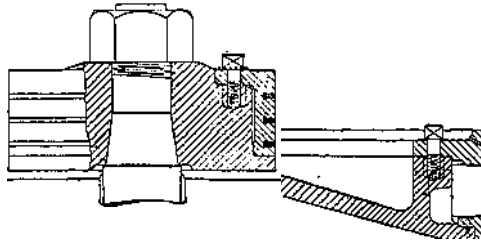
Typical Piston Packing Rings and Methods of Fastening in Marine Practice
